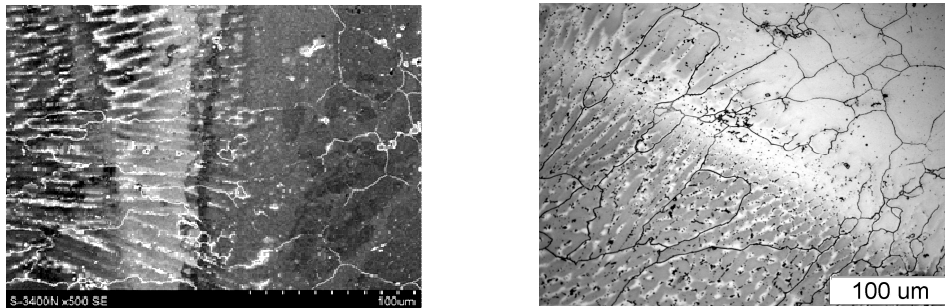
Examples of smooth microstructure transition from welded joint to the parent metal, a) HR6W welded joint, SEM, b) Sanicro 25 welded joint, LM.
